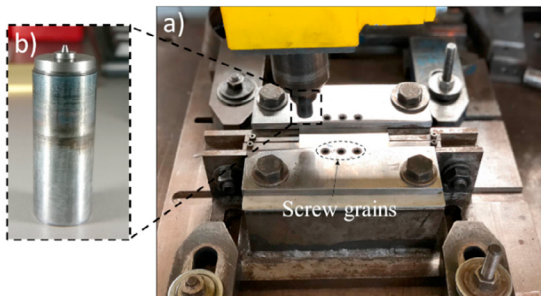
(a) Clamp fixture; (b) Pin tool utilized.
